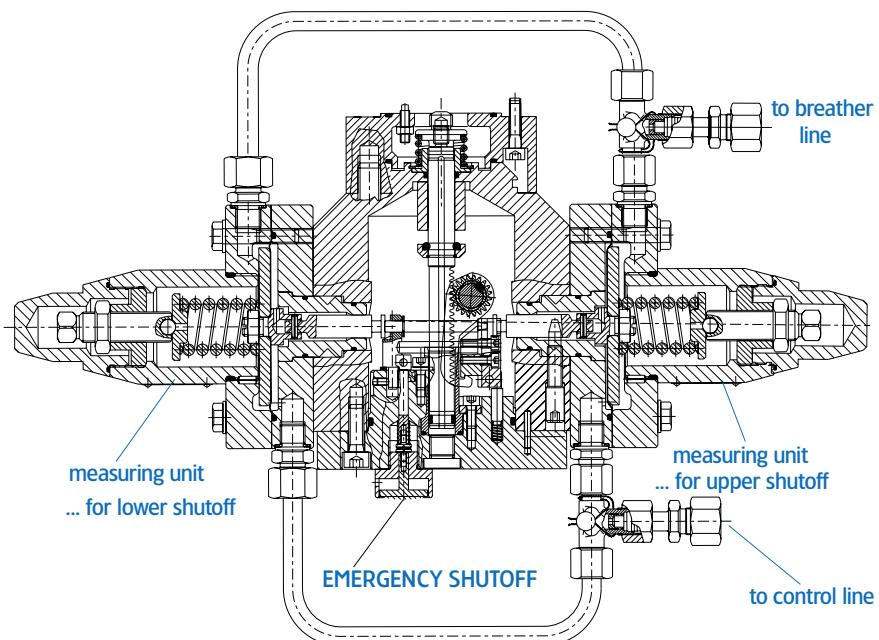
Type SID Safety shutoff Valve - Sectional view
